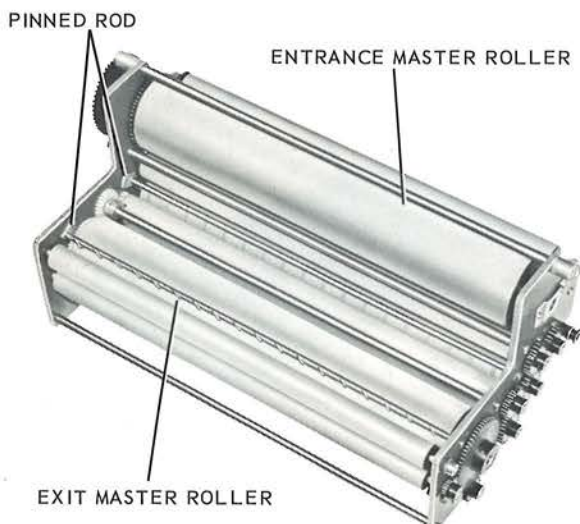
SQUEEGEE CROSSOVER ASSEMBLY
